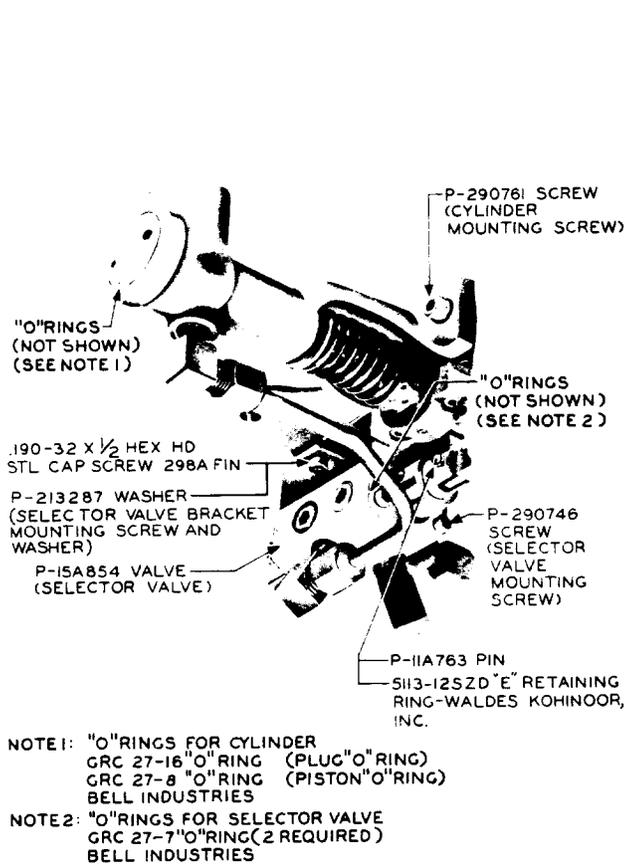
Tab-Clipping Control Unit (partial view from below right front of table) — 659A and 659D Tools Only
